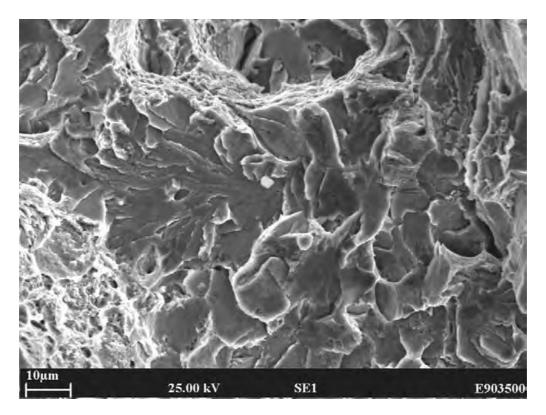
SEM fractograph, showing detail of cleavage fracture apparent at the right hand hole edge of figure 28.
